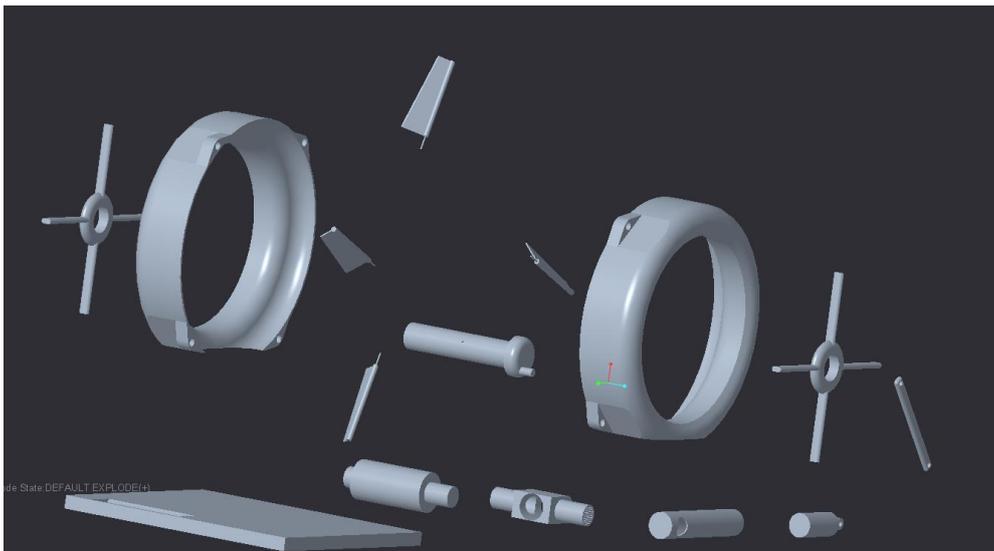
The exploded view of the reverse osmosis WEC. This picture was originally intended for the group to see how to 3D print and assemble the WEC as best as possible.
